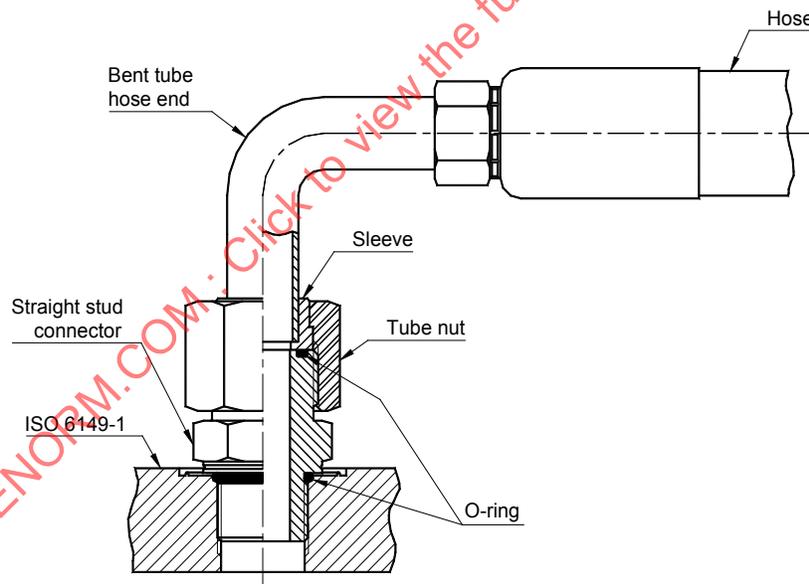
Typical connection – Non-adjustable connector to hydraulic hose
